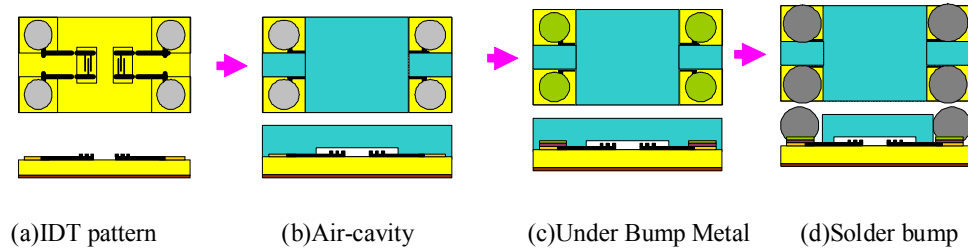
Wafer-level assembly process using sacrificial layer and solder bump.
